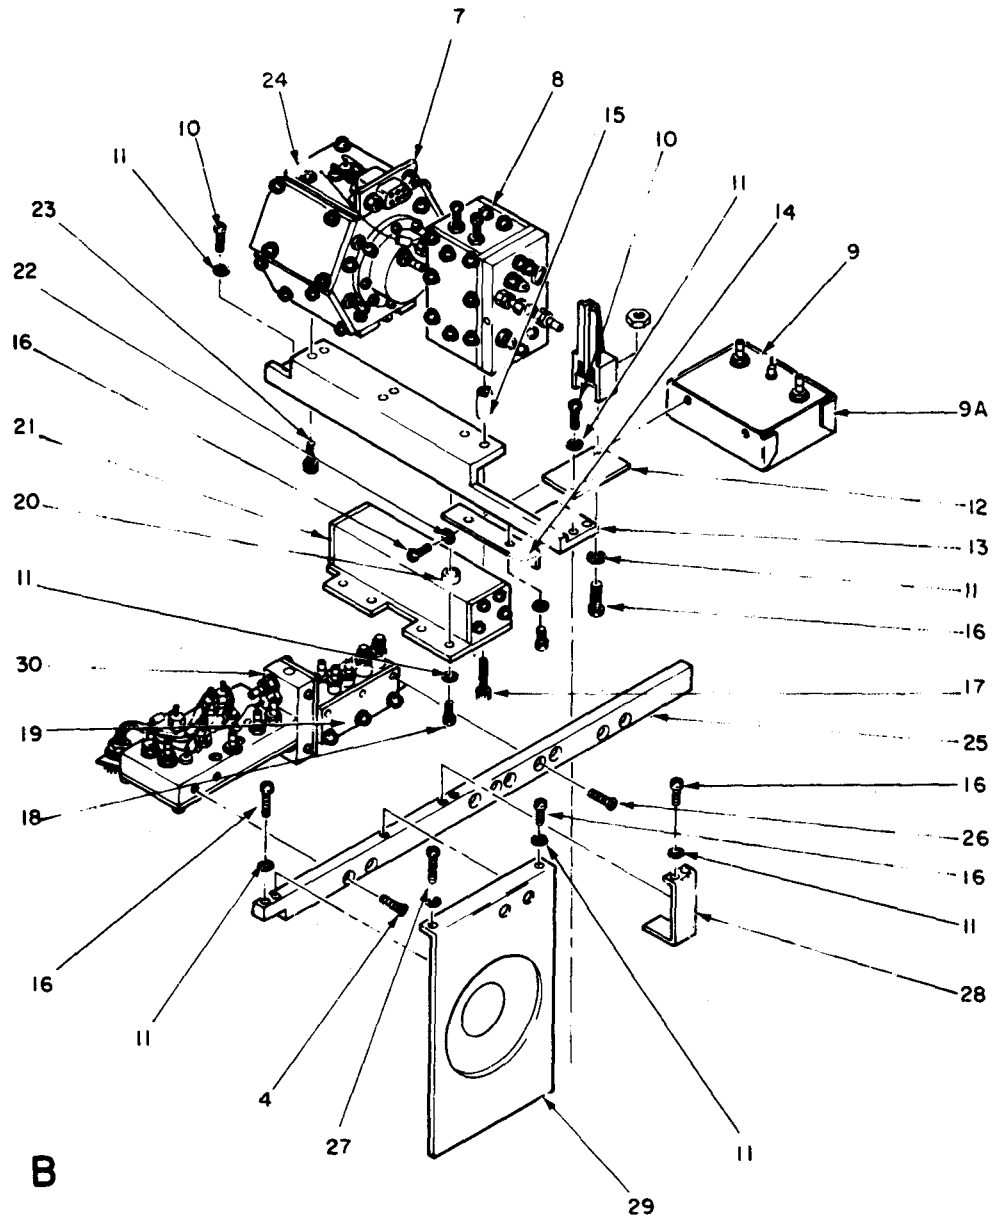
Mechanical Assembly Composite A1 (Sheet 1 of 8).
